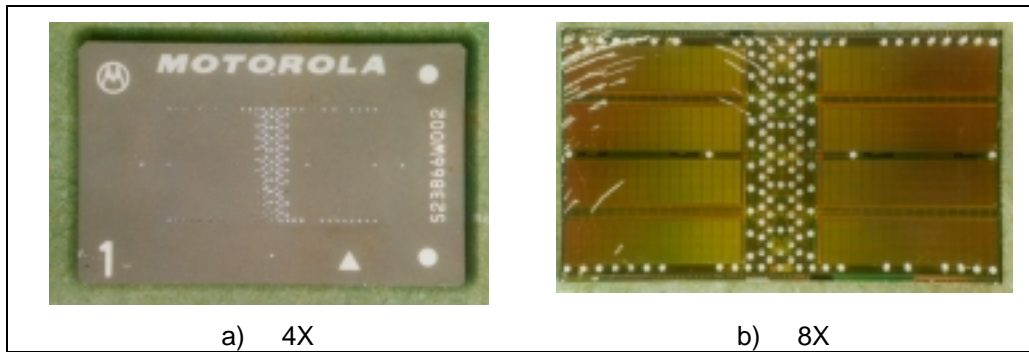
Ceramic substrate (a) and die (b) after the part deprocessing. The solder "threads" on the die surface (left top corner) were formed during desoldering. These "threads" were located on the polyimide film and did not cause any damage to the die.
